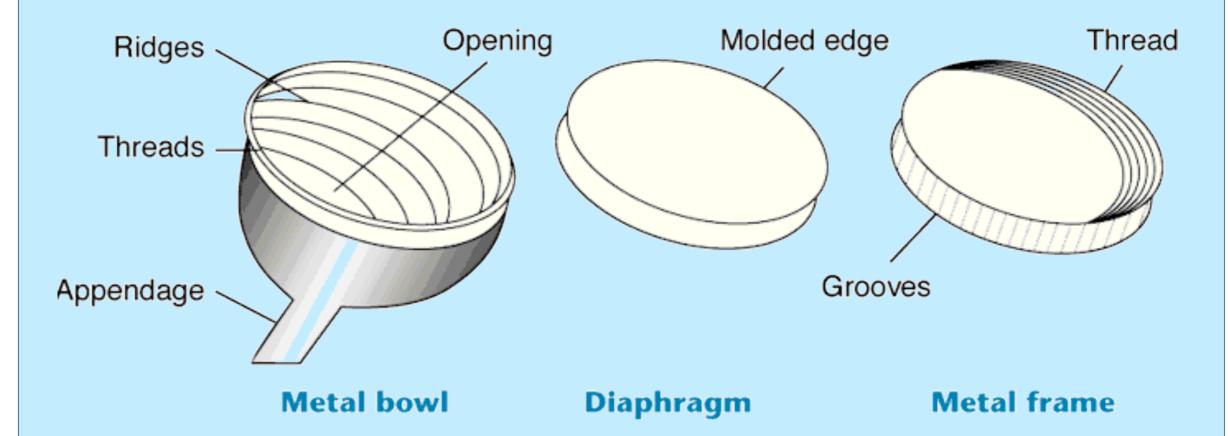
Exploded View of a Diaphragm Contact Piece
